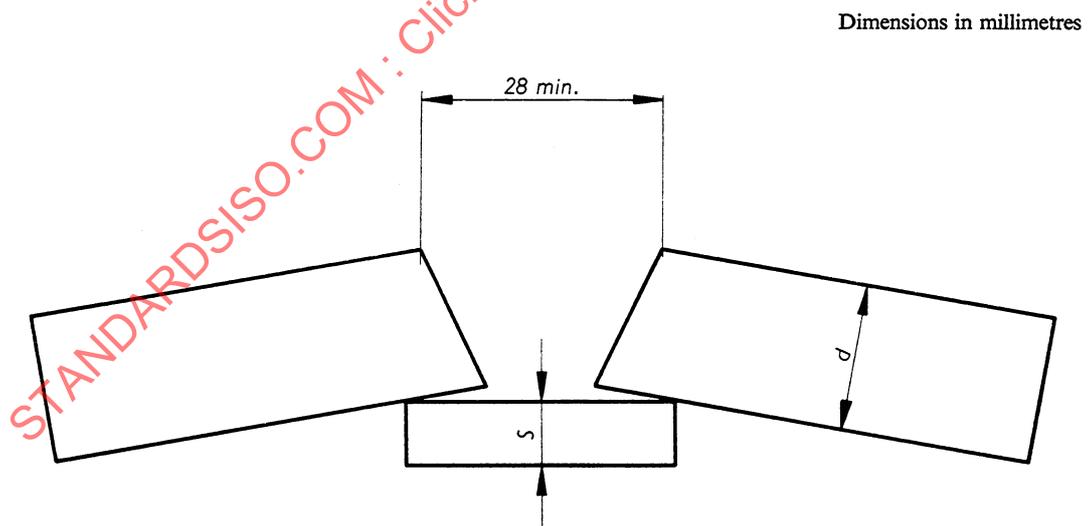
Pre-setting of test plates for tack-welding
